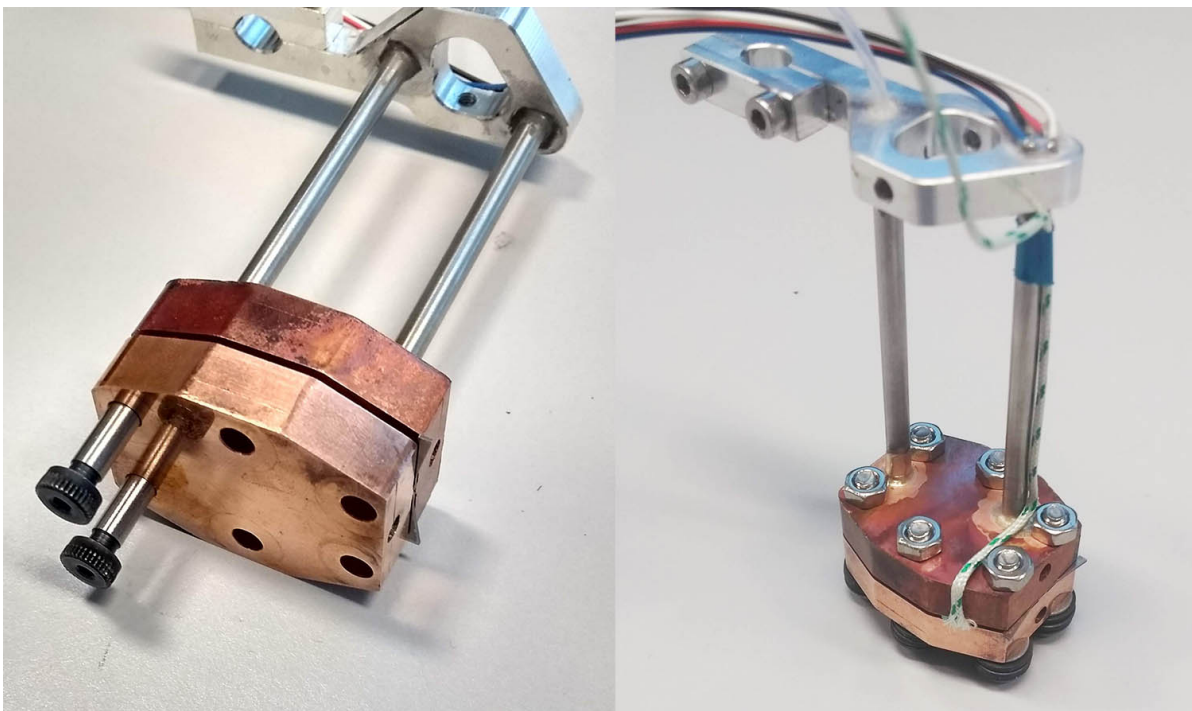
Thruster body layer alignment using shoulder bolts (left) and the fully re-assembled thruster with installed thermocouple (white-green sleeved cable) (right).
